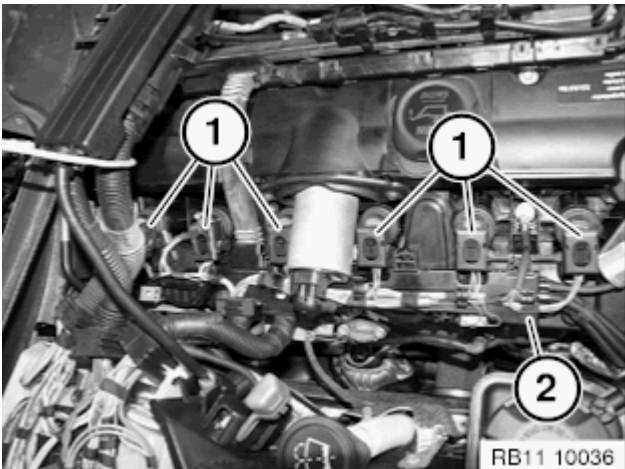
Unlock Cable Channel Of Cylinder Head Cover And Detach
